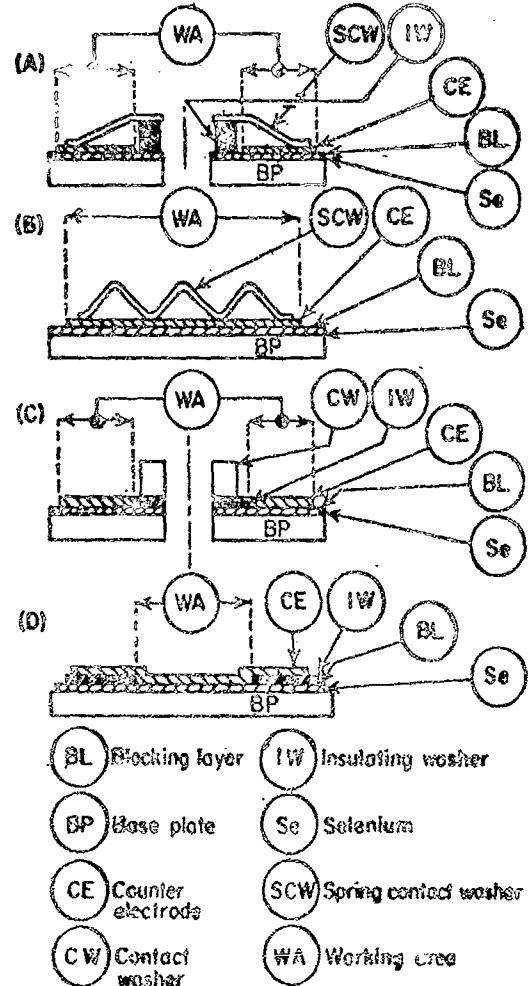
Typical contact spring arrangements for stacking. (A) Spring washer and insulating spacer. (B) Slotted spring contact. (C) Solid contact spacer. (D) Solid control disk.
